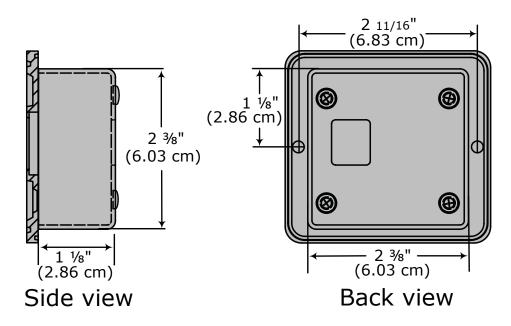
, Cut-Out Dimensions for Flush Mounted Remote
